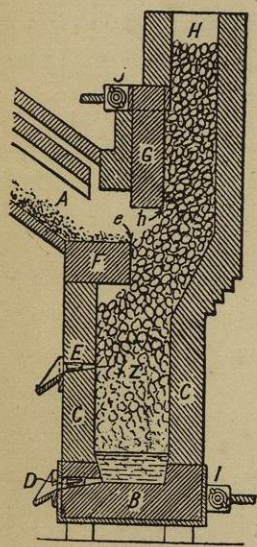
No. 1 Heroult Shaft Furnace (early type).
